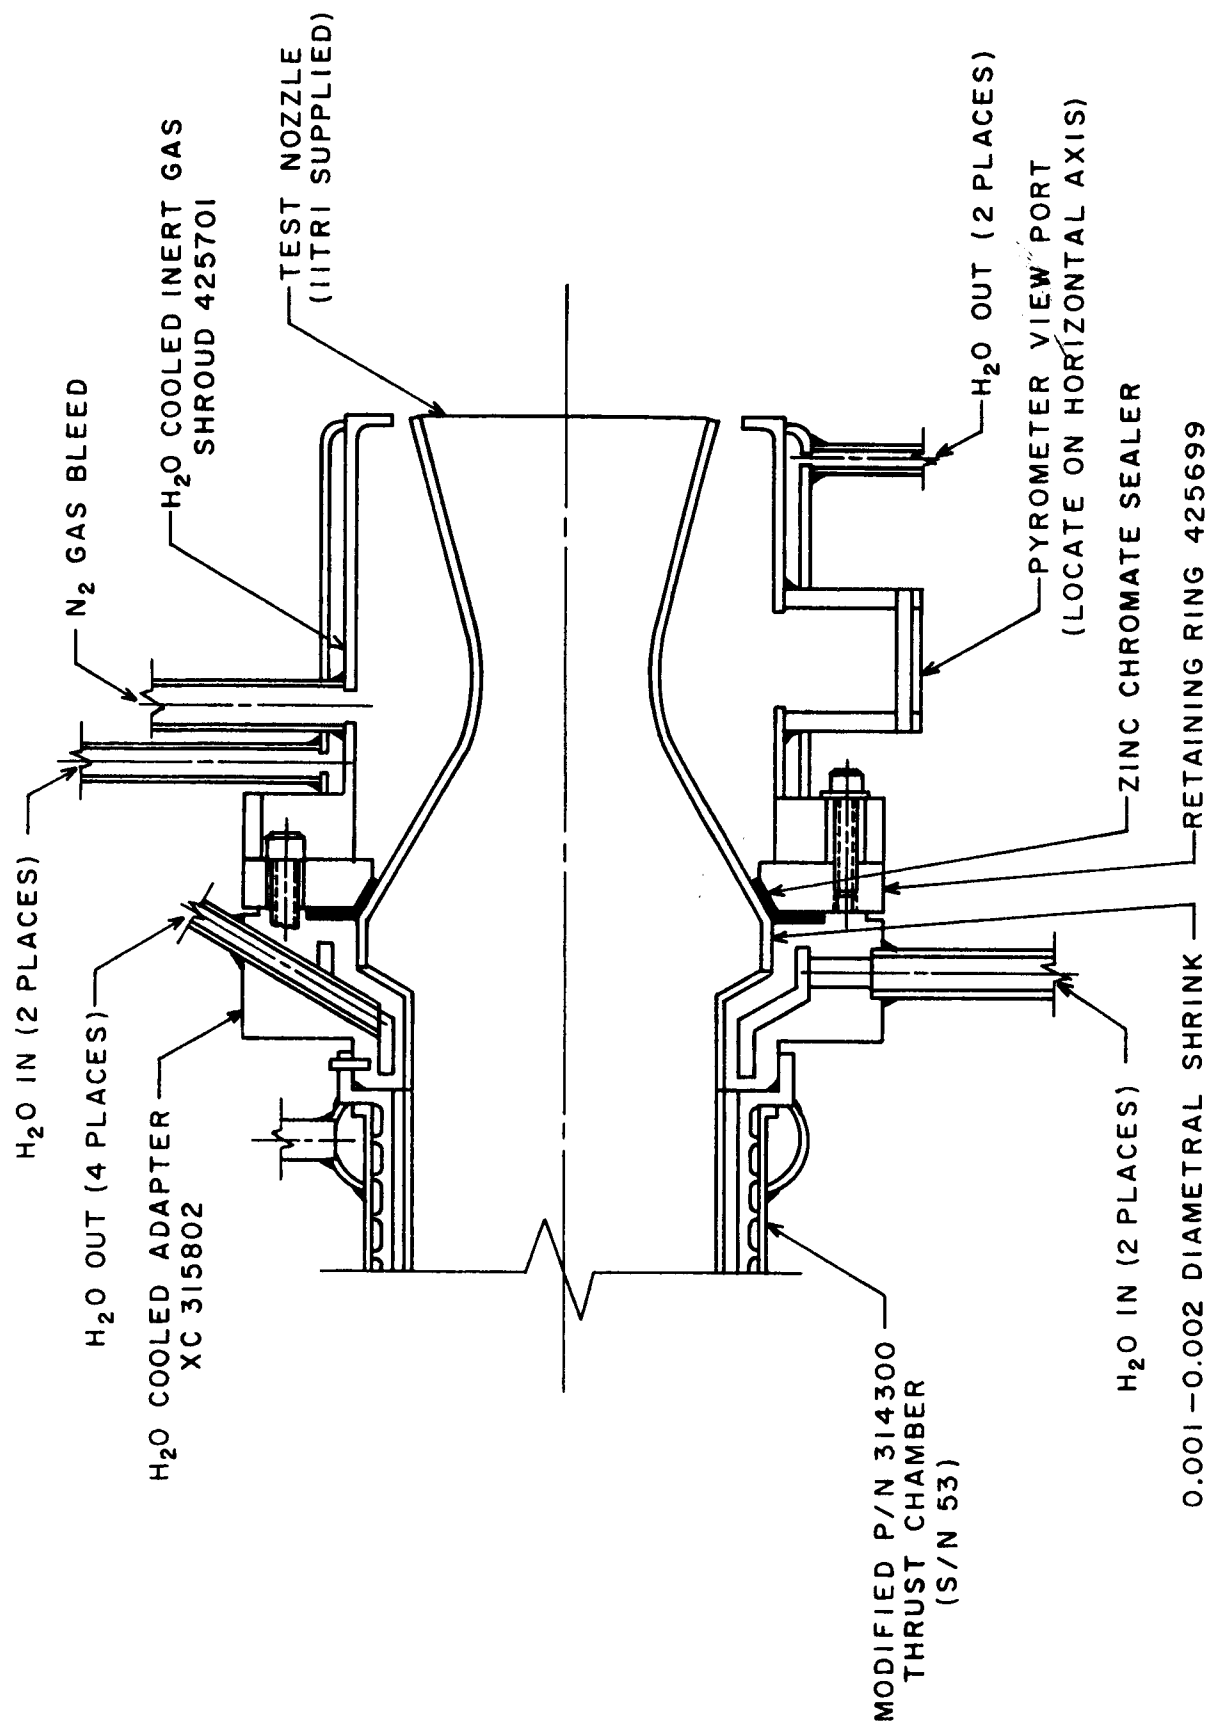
Test Installation for Refractory Metal Coated Nozzles (H₂O Cooled Inert Gas Shroud)
